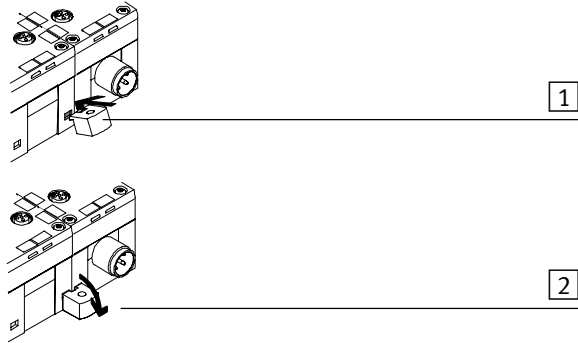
/14: Fitting fastening type CPX-BG-RW-10X
